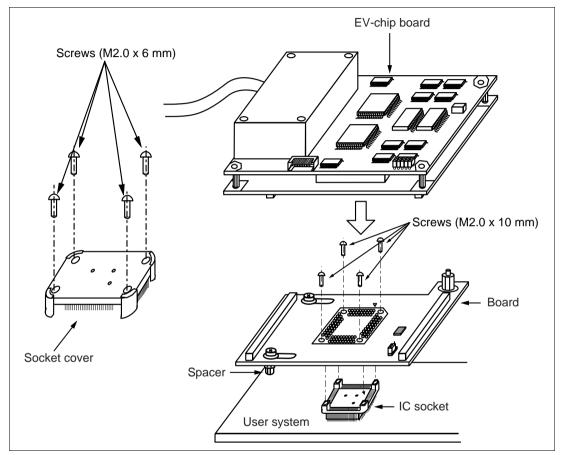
User System Interface Board for the SH7145 FP-144F Package
